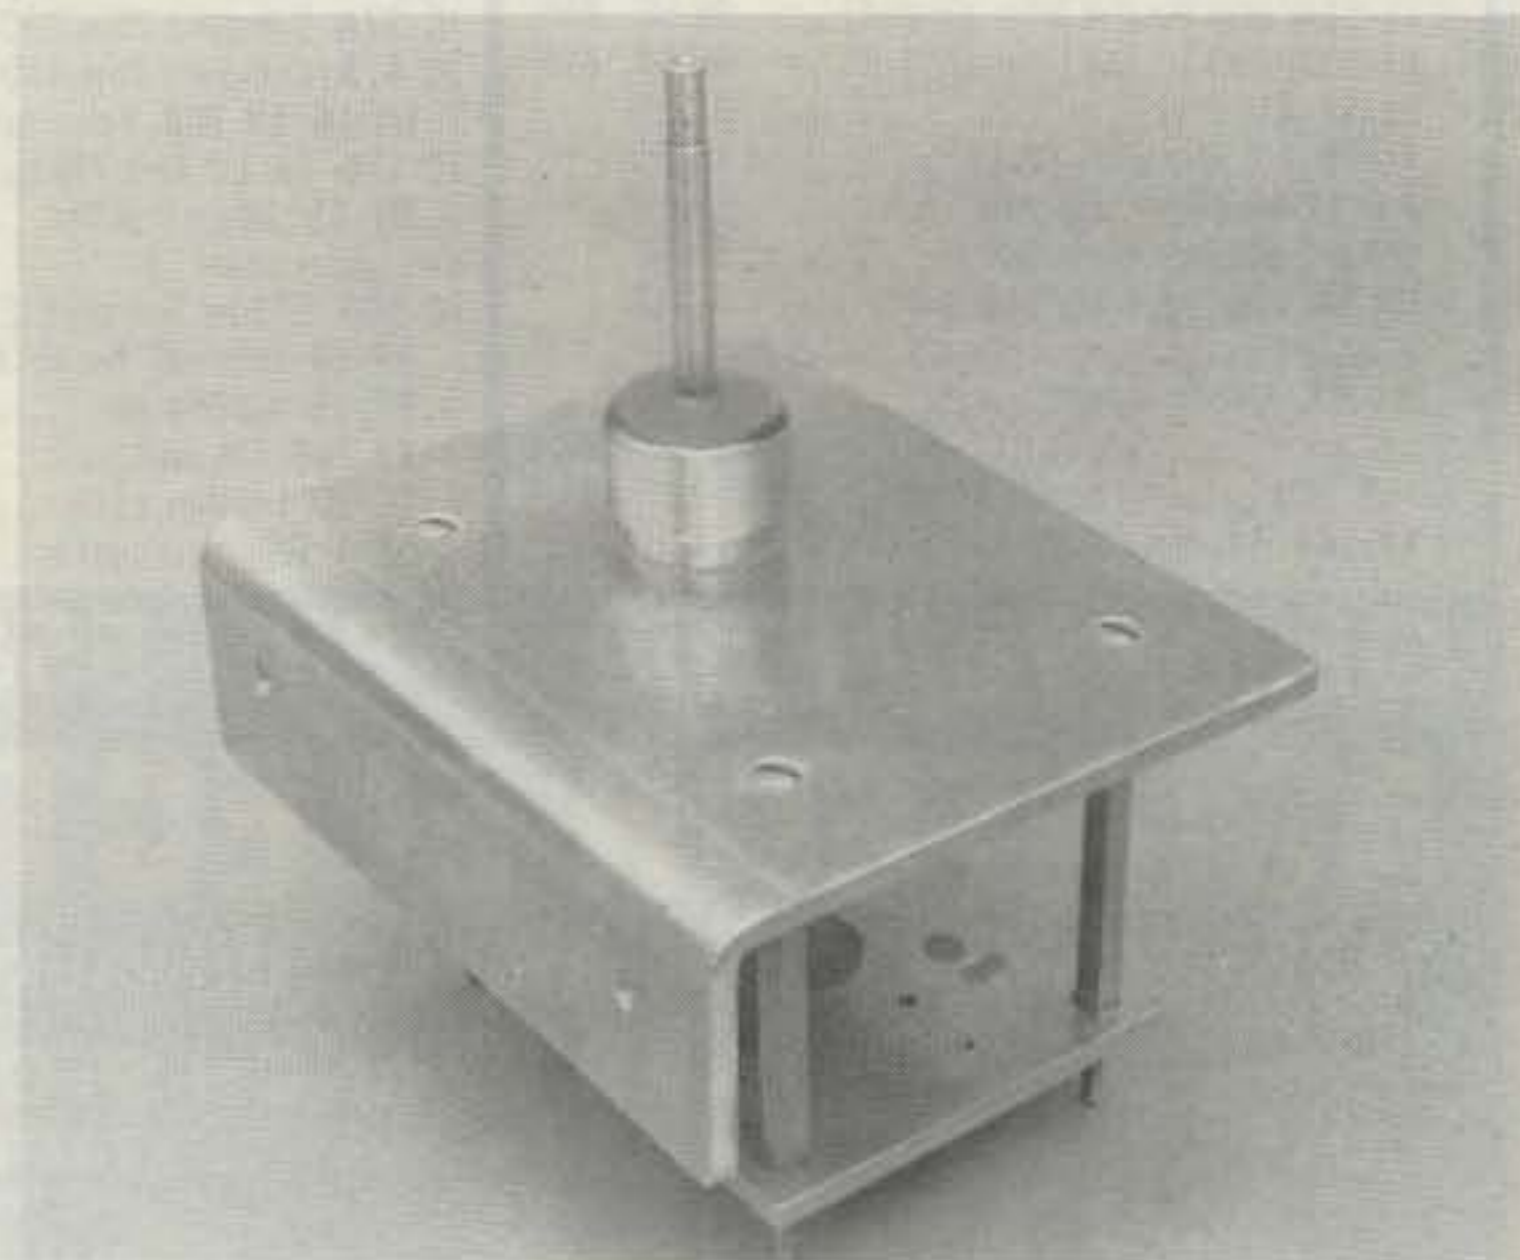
Photo B. Anemometer head with cups removed showing top bearing seal and side mounting surface.
